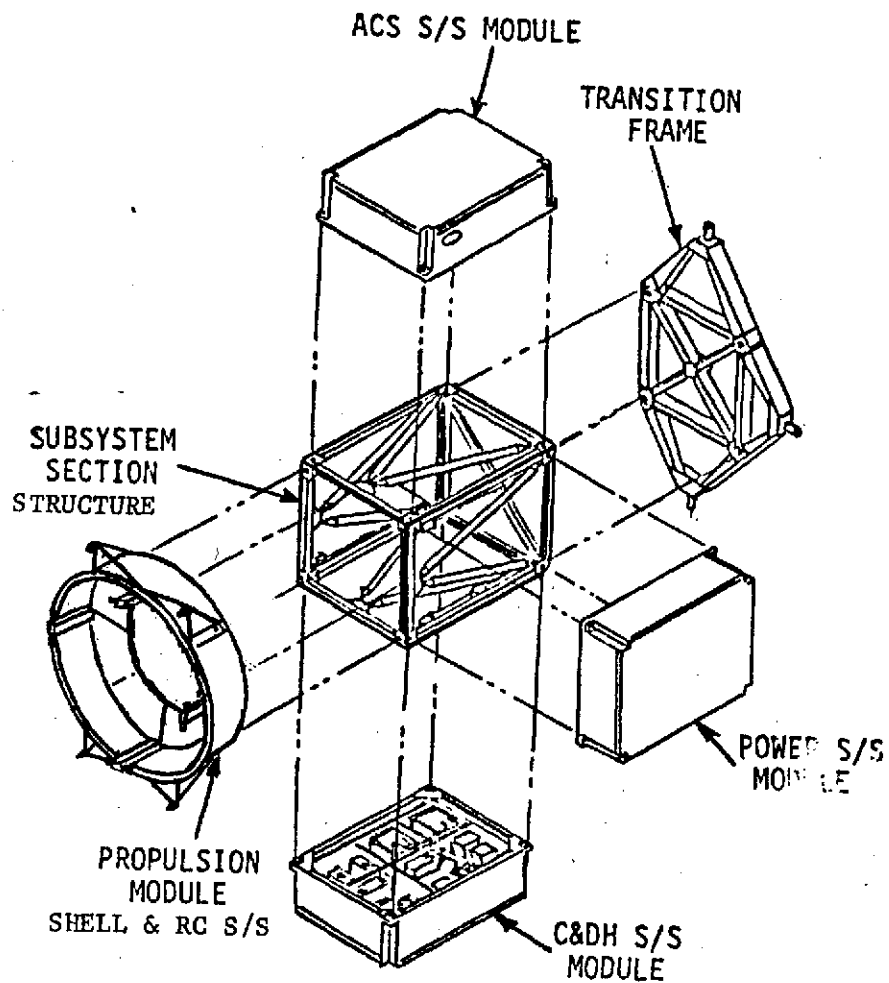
GENERAL PURPOSE SPACECRAFT SEGMENT EXPLODED VIEW
